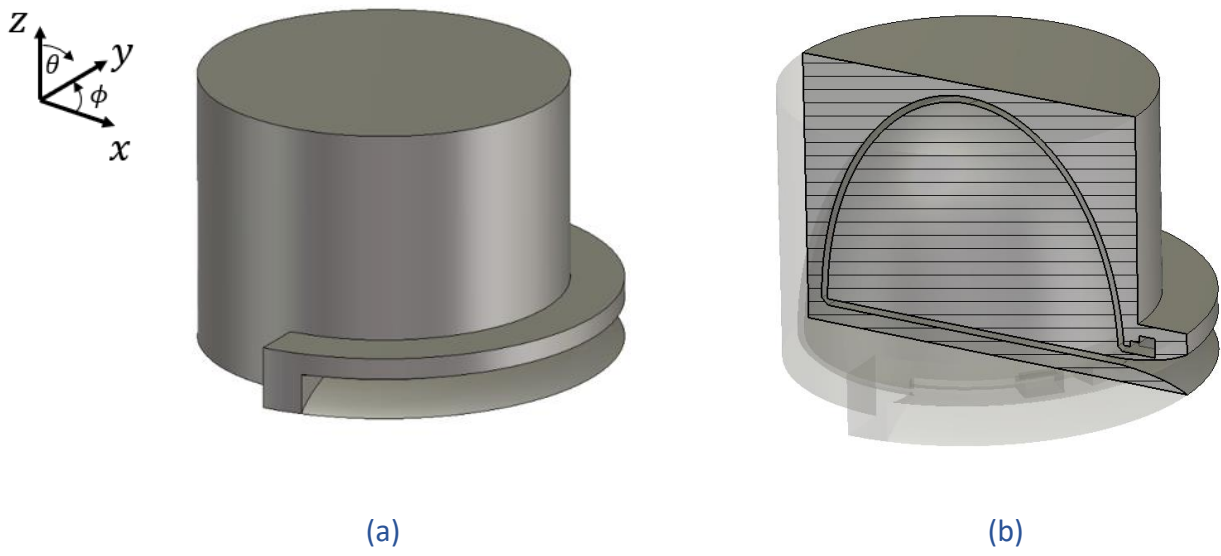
Perspective view metal part (a) of double layer lens antenna and cross section view (b).
